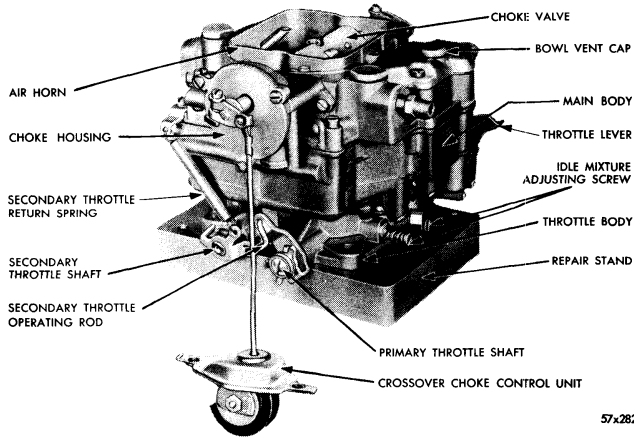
Four Barrel Carburetor with Cross-over Type Choke
